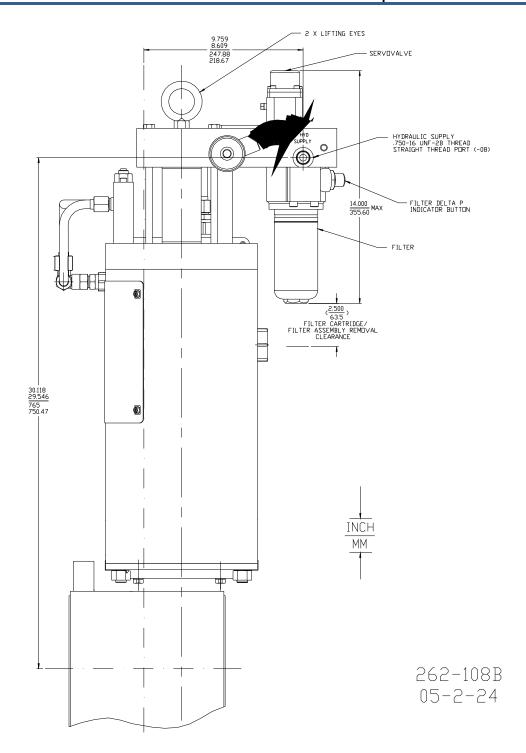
6" Gas Stop/Ratio Valve Outline Drawing
